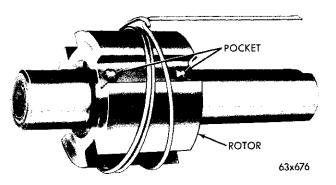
Slipper Retainer Wire Tool Installed on Rotor
